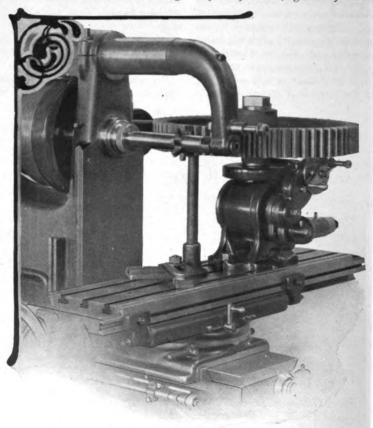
MILLING A LARGE GEAR, USING THE VERTICAL FEED.
